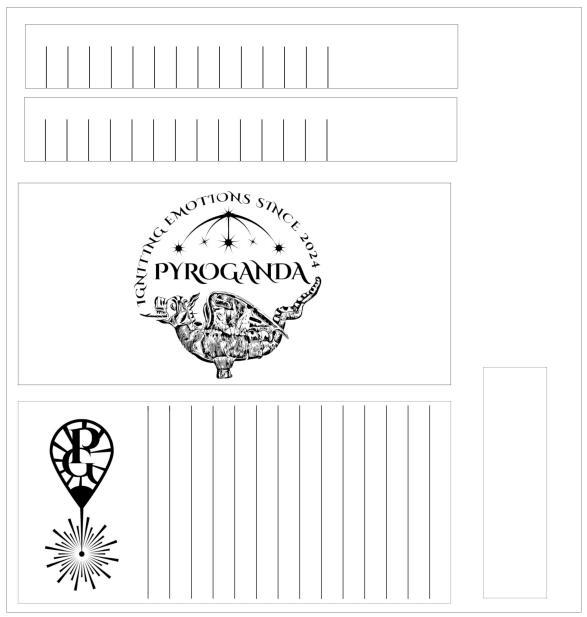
Laser-cutting template for the construction of the sawing aid. The width of the frame surrounding the components should be set to 200 mm. The template is designed for a 5 mm thick sheet of material.
